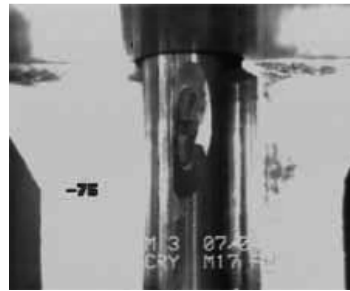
Example of fretting wear in fuel rod EDF PWR 1300 [63]
